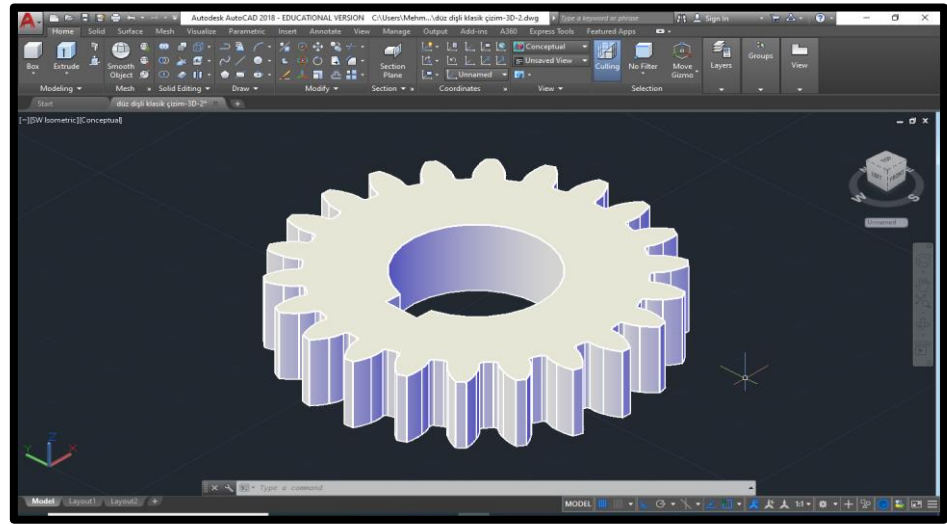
Spur gear designed in 3D with classical method in AutoCAD program
